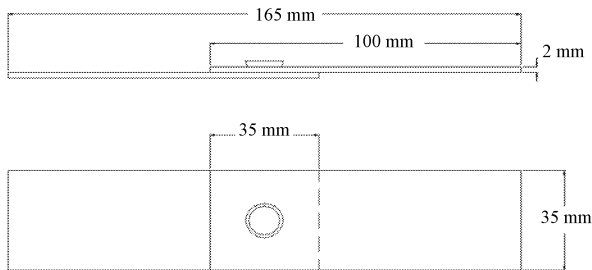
Geometry and dimension of FSSW lap-shear specimen for magnesium alloys [11].
